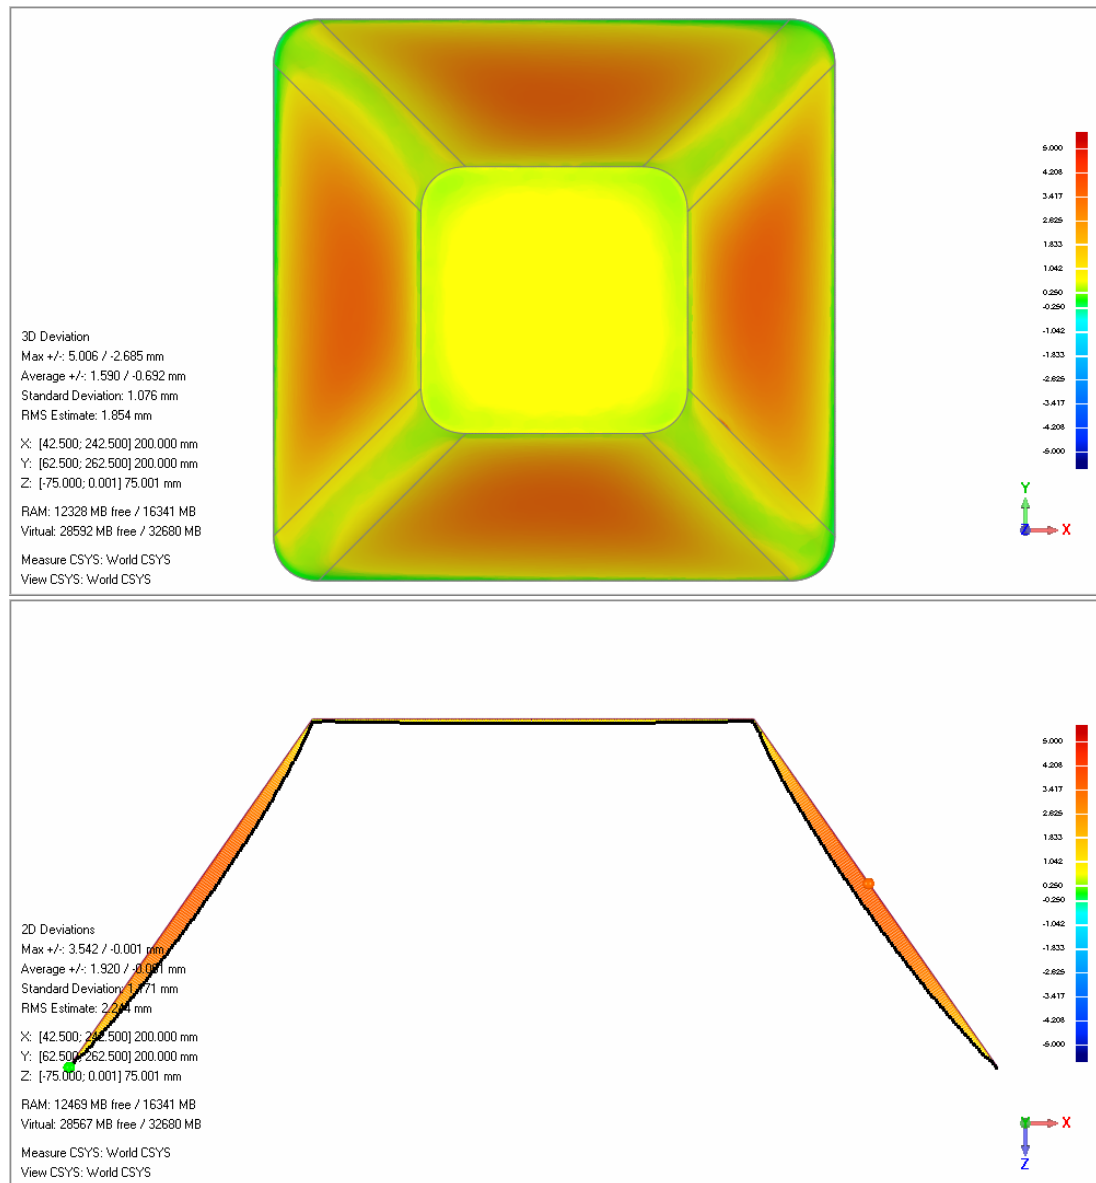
Part T4B geometric accuracy results - top view and cross-section view
